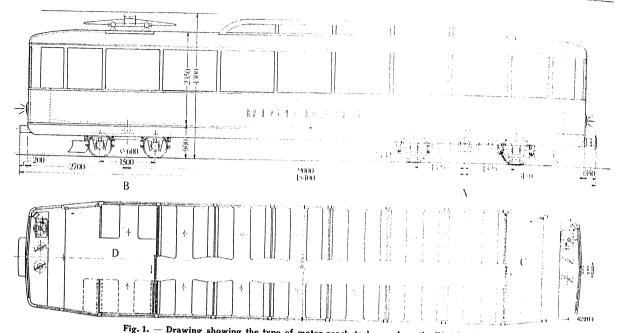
Drawing showing the type of motor-coach to be resed on the Rigi Railway.
